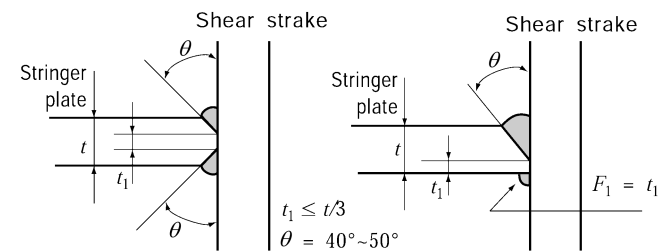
Welding construction of joints between sheer strakes and stringer plates of strength deck
